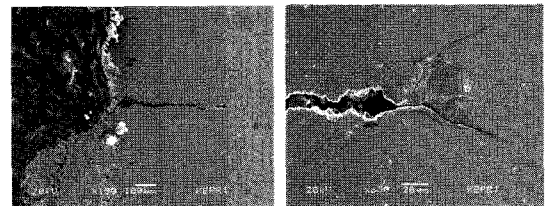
SEM image of axial crack at the blade suction side showing the multi-branches at the crack tip
